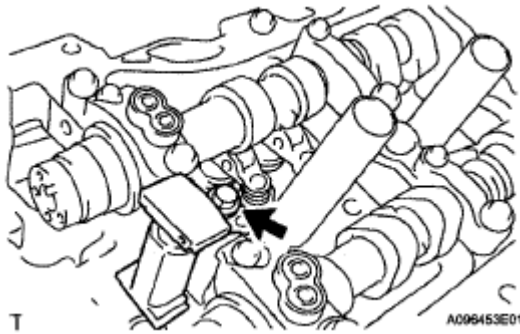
Locating Chain Tensioner No. 3 Bolt
